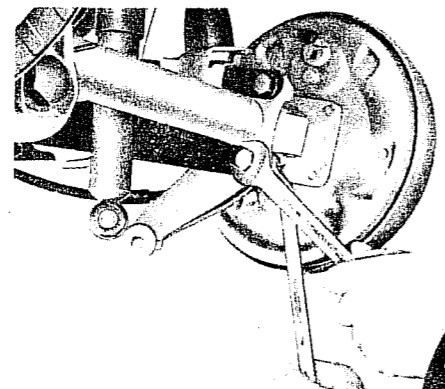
Detaching the spring plate from the axle tube. - Swing axle.
